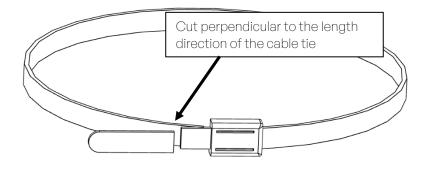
Cut the excess cable tie perpendicular and close to the lock
